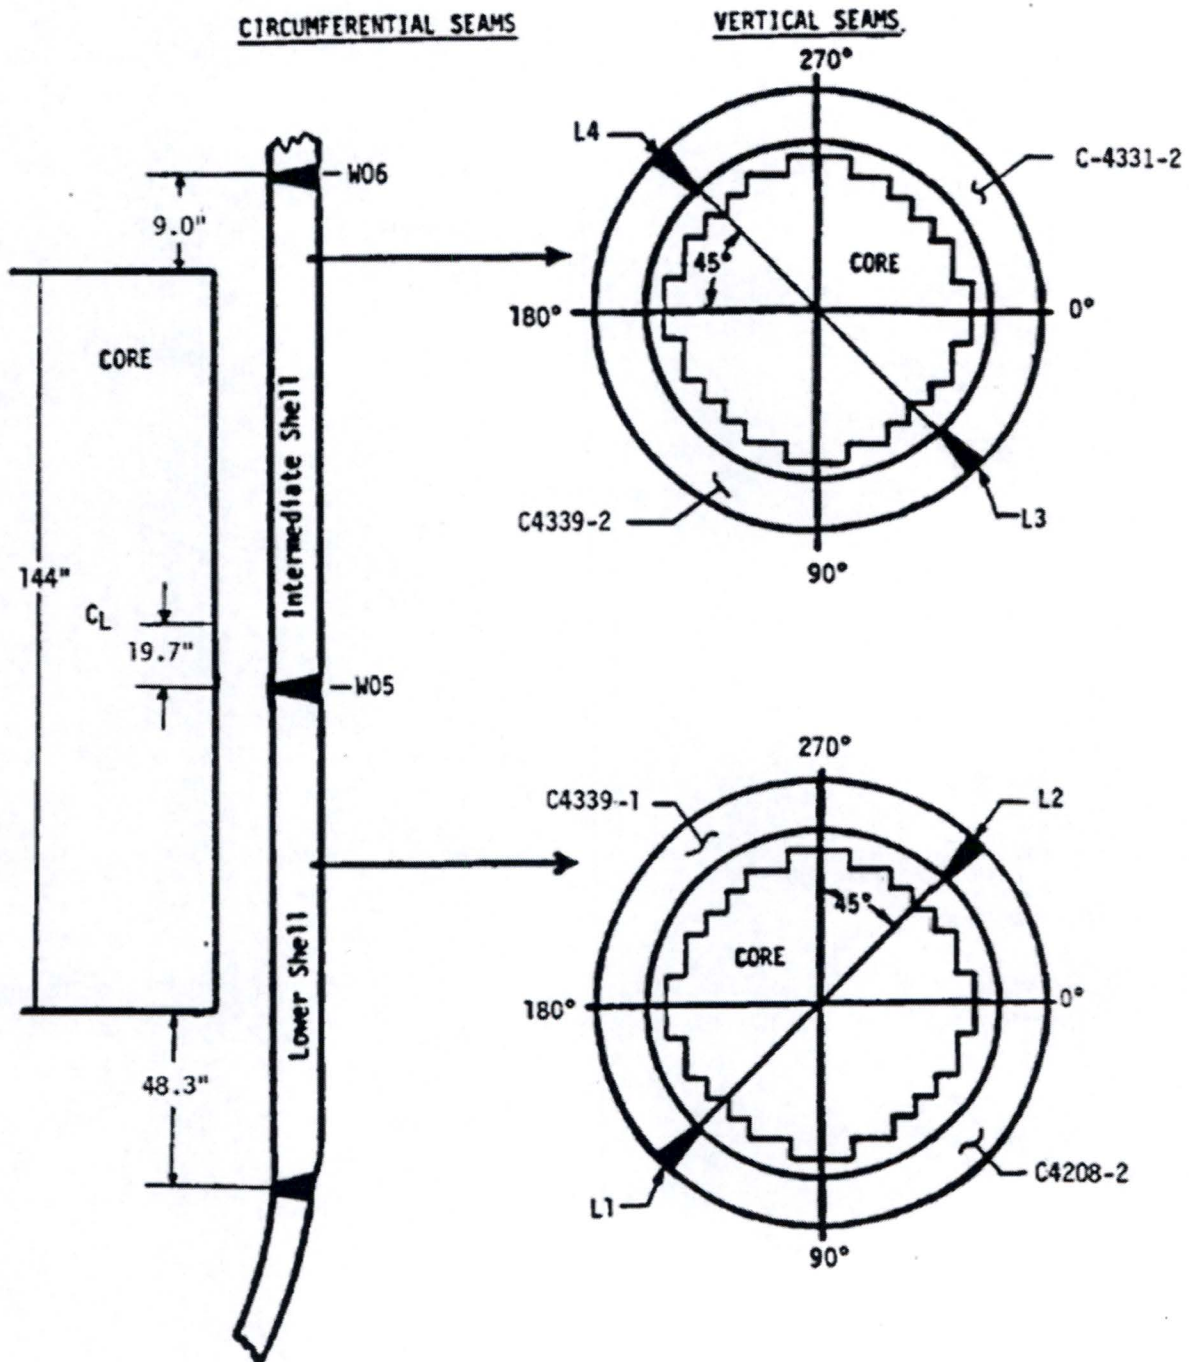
RPV Weld Identifications for Surry Unit 2
